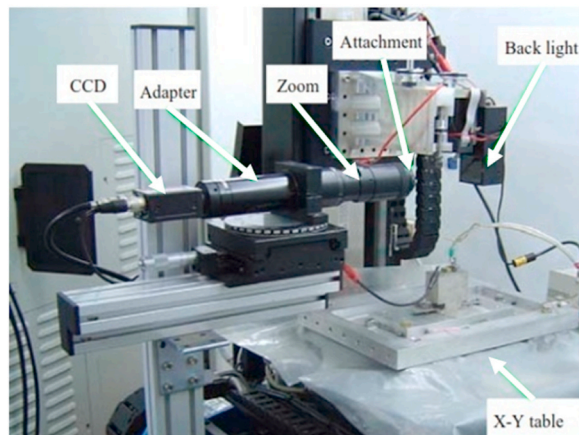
Experimental configuration used to measure tool wear with a machine vision system directly [49].
